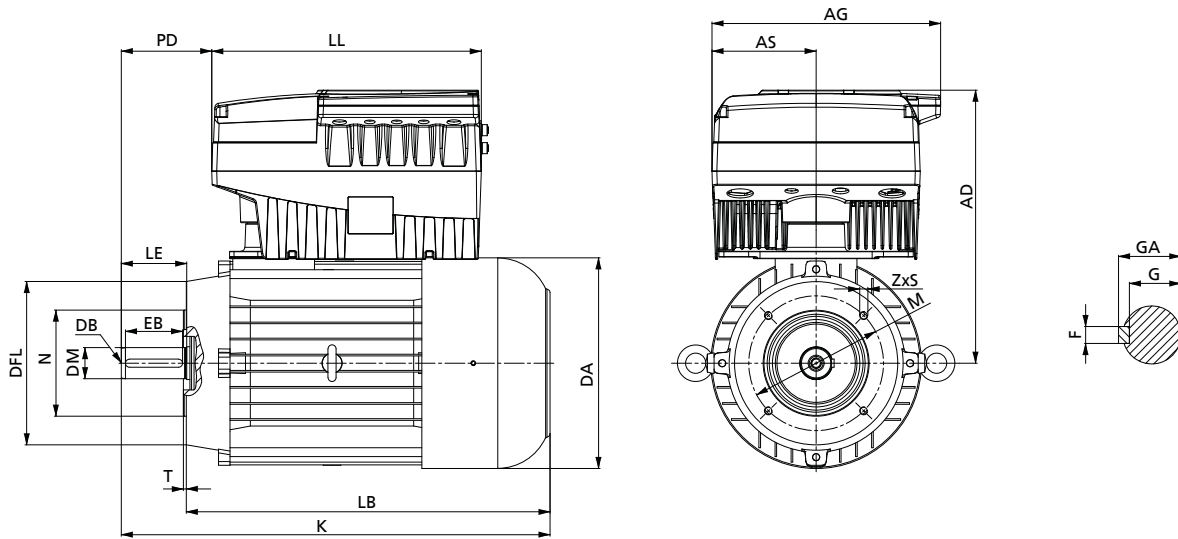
Version with FT flange with tapped holes (V18, etc.)
